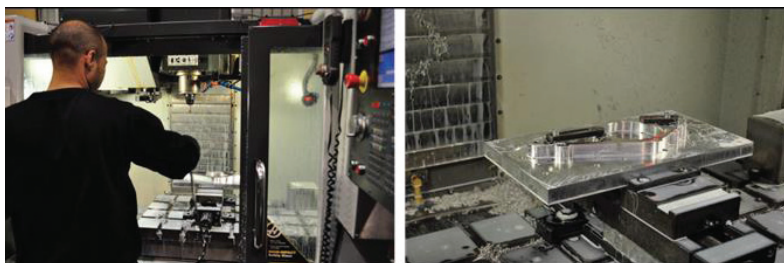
Machined differential support by 5Axis CNC. Photos by a project's partner, UMESAL S.L
